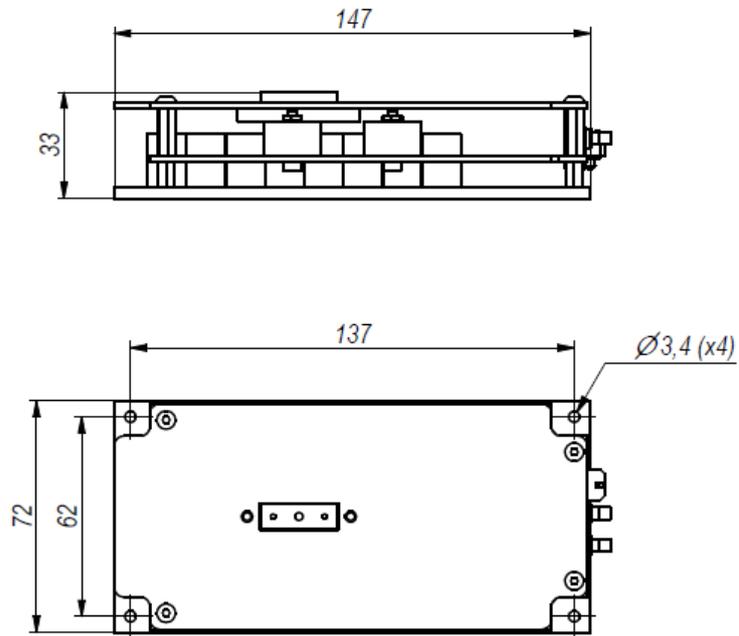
Outline drawing and dimensions of the driver 2DPB2-300-3.4
